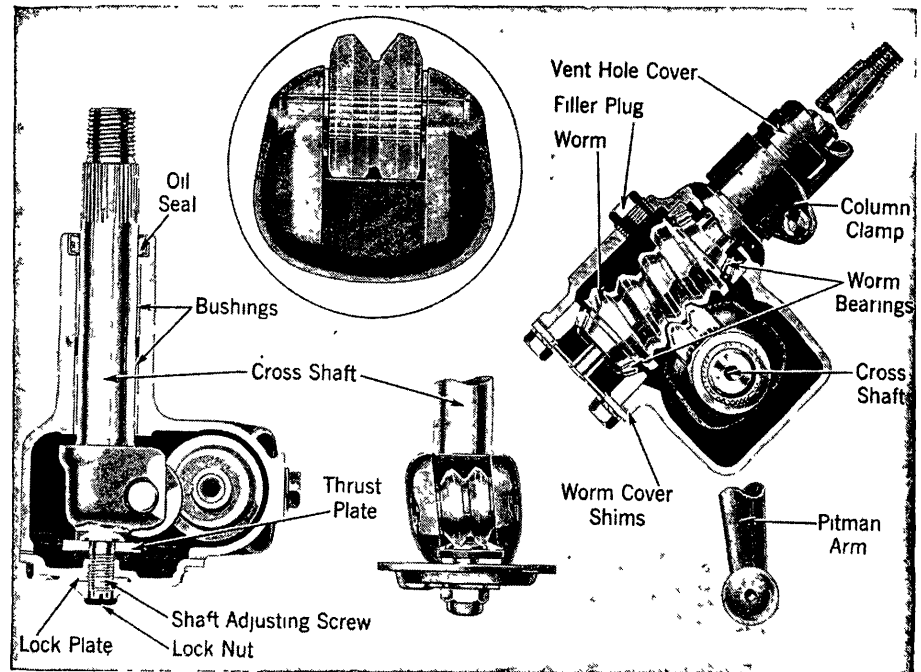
Gemmer worm and roller with external mesh adjustment. Some gears of this type have three-tooth rollers
